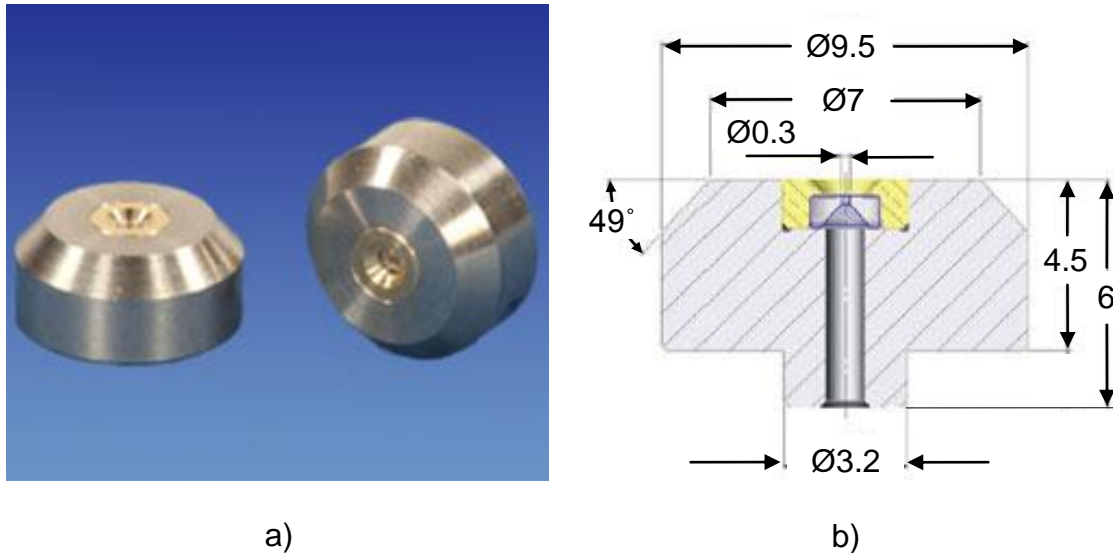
a) the nozzle, and b) its cross-sectional view (all dimensions are in millimetres)
